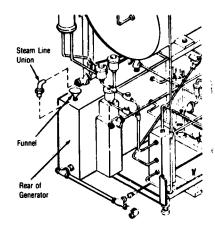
CLEANING OPTIONAL STEAM GENERATOR.
